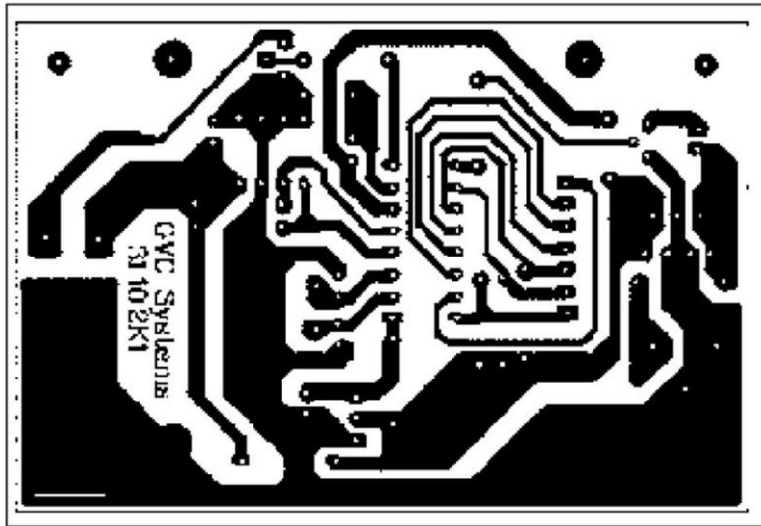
Actual-size, single-side PCB for the access-control system without keypad (Main PCB)
